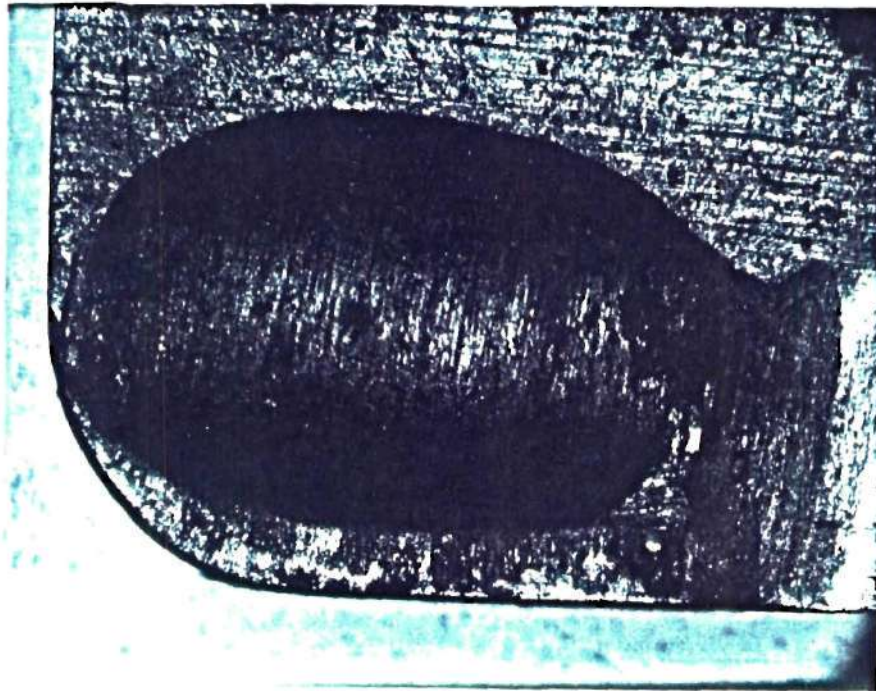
Crater Wear of an Uncoated Tungsten Carbide Tool Machined for 4 Minutes, 13 Seconds at a Surface Speed of 106.7 Meters per Minute
